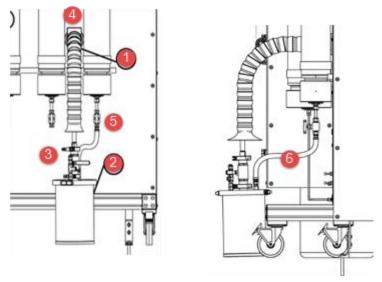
Figure showing the connection of the containment system. (1) vacuum hose snorkel, (2) containment system, (3) collector lid, (4) damper, (5) collection valve, and (6) rigid tubing.
